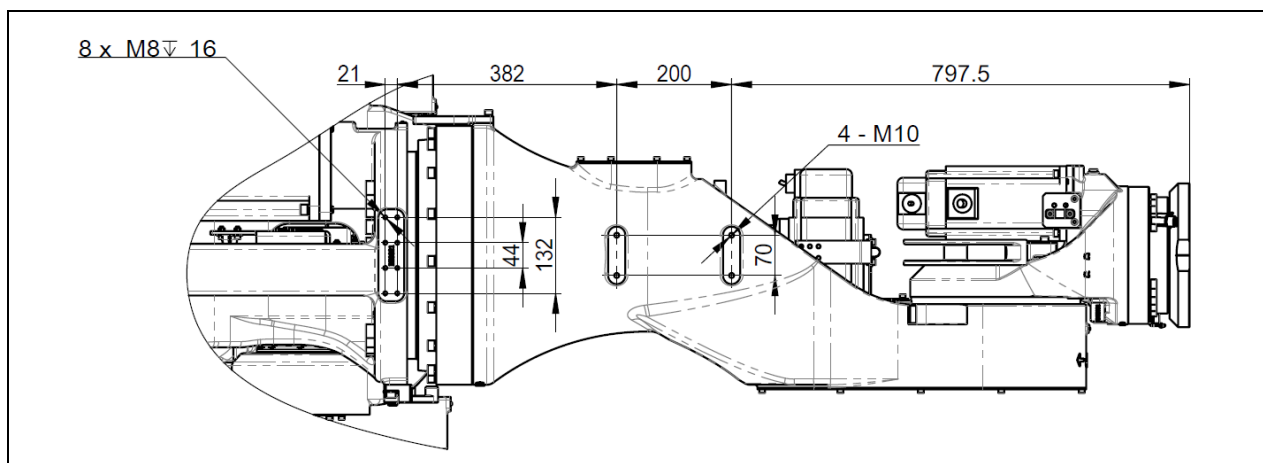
Equipment mounting face (ER500-2800, ER600-2800, ER700-2800)
